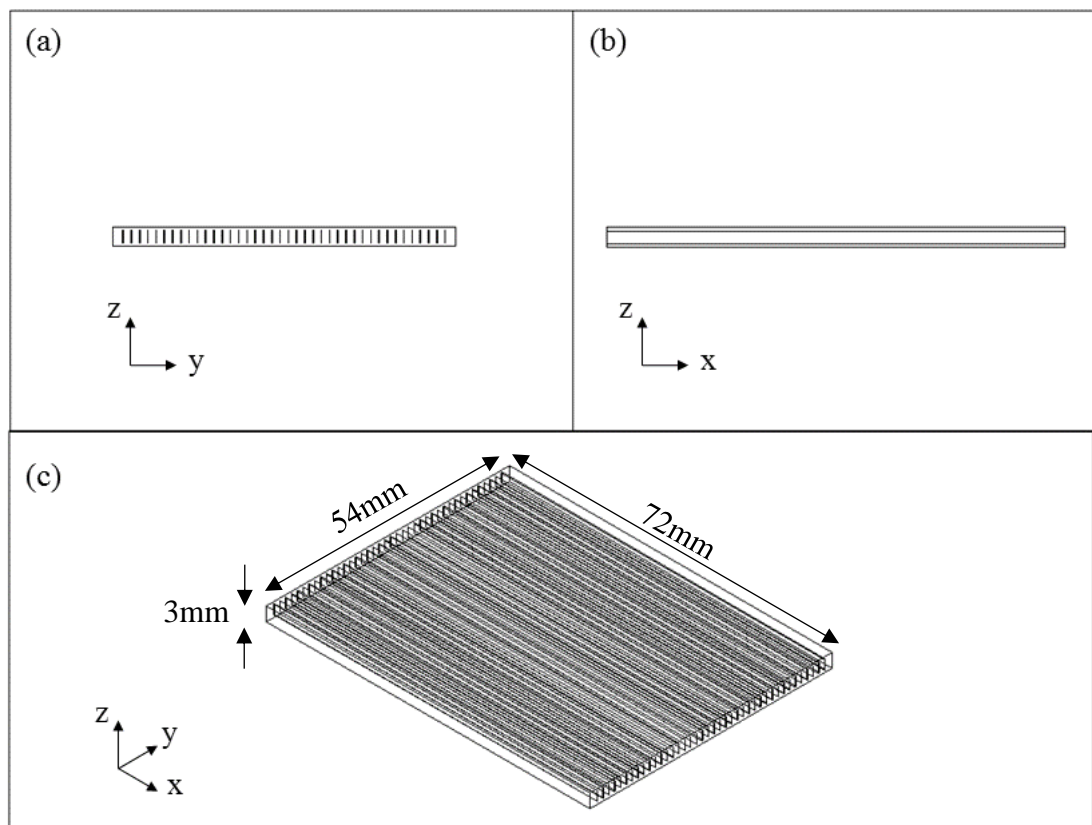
(a) Top view, (b) side view and (c) isometric view of composite's CAD drawings.
